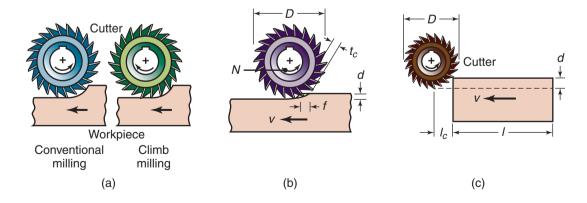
(a) Schematic illustration of conventional milling and climb milling. (b) Slab-milling operation showing depth of cut, d; feed per tooth, f; chip depth of cut, t_c , and workpiece speed, v. (c) Schematic illustration of cutter travel distance, l_c , to reach full depth of cut.
